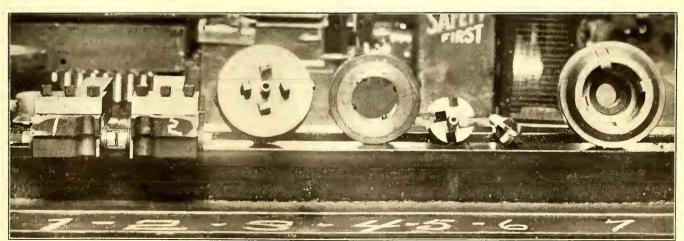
TOOLS MADE AND USED IN COLD SPRING SHOPS, INTERNATIONAL RAILWAY—1, 2, PAIR OF FLANGING TOOLS FOR TIRE LATHE; 3, 4, 5, TOOL FOR SURFACING END OF BALL HANGER; 6, TOOL FOR FORMING SPHERICAL SEAT FOR BALL HANGER; 7, SELF-CENTERING CHUCK FOR TROLLEY WHEEL
